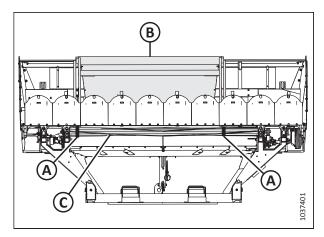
R216 Header with Conditioning Rolls – Cutterbar Side
